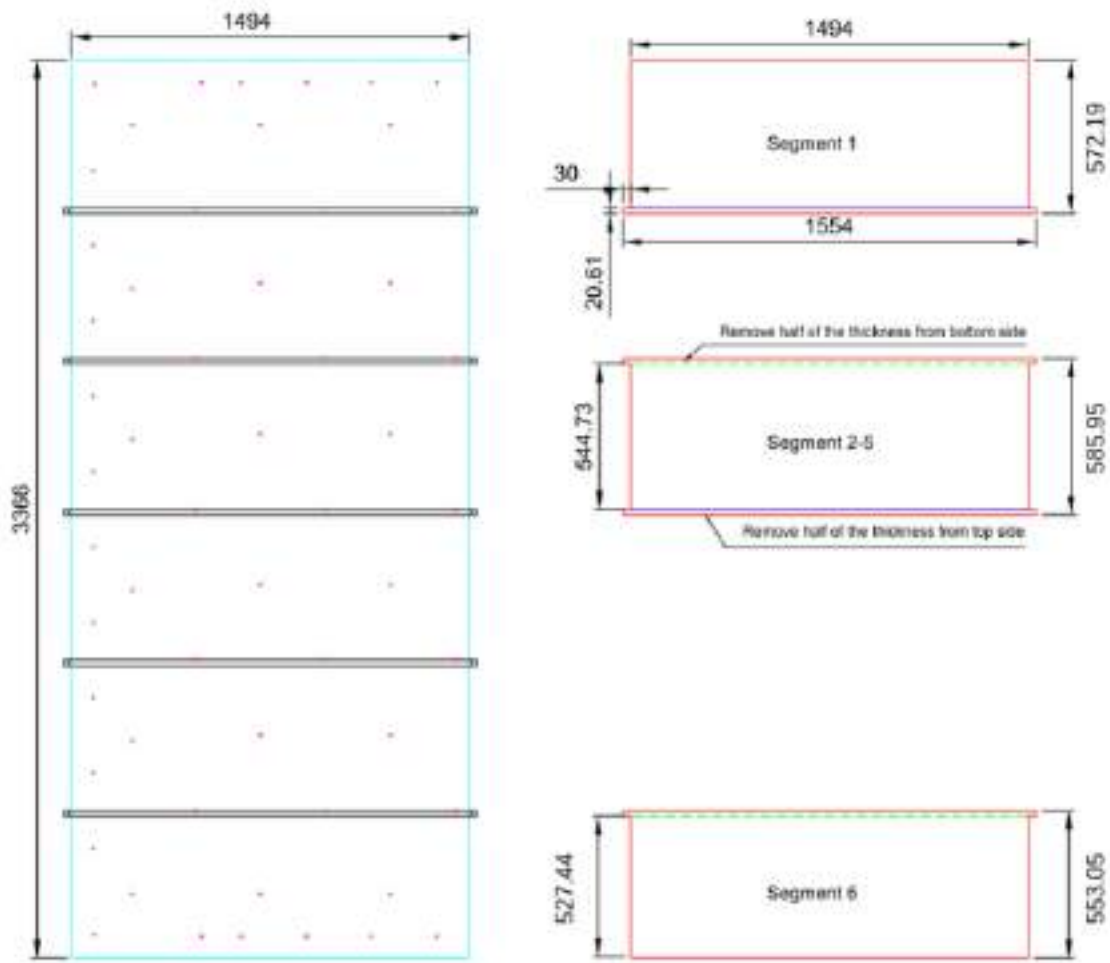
Each PCB panel is constructed by gluing six PCB segments together. There are three different flavors with different widths, half-lap joints and copper patterns: segment-1, four identical middle segments and segment-6.
